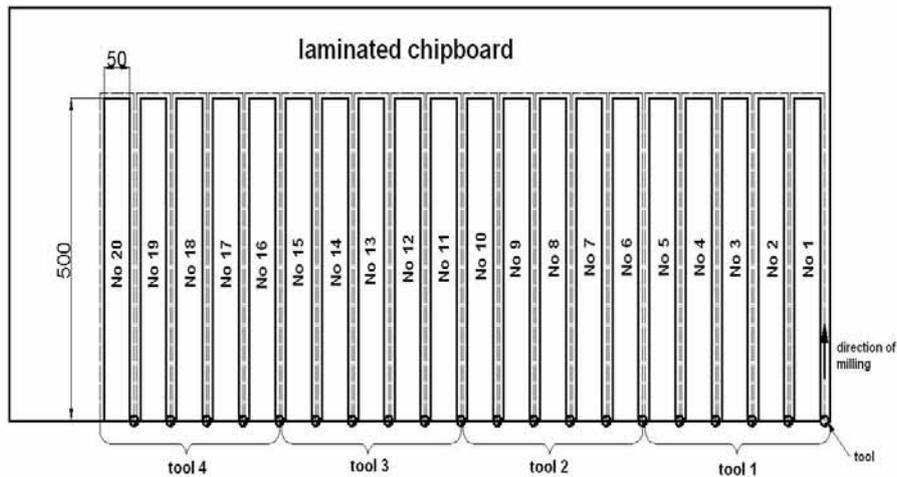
Milling schema of inspection work pieces with their dimensions
